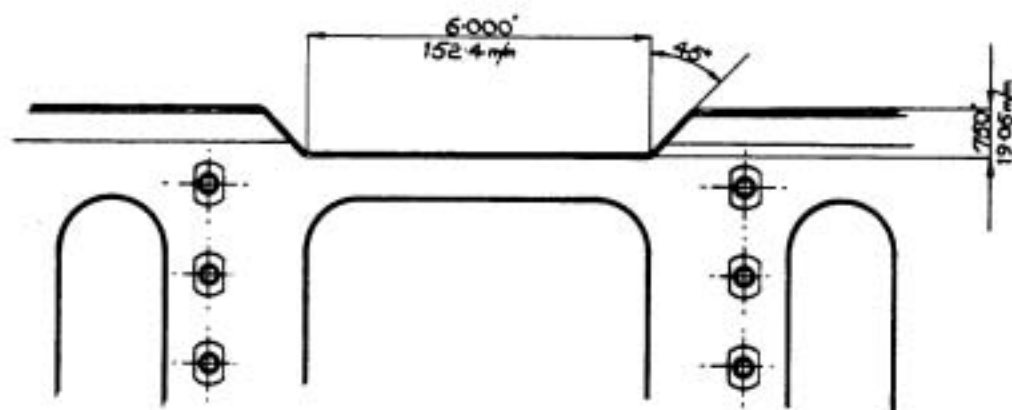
MODIFICATION TO RADIO MOUNTING TRAY.
